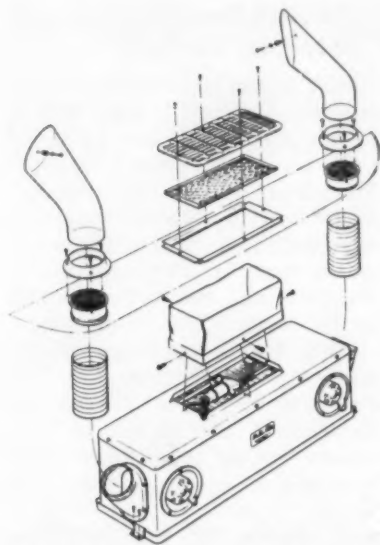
Exploded view shows duct connections and cooling case assembly of 1956 "Executive" model.
